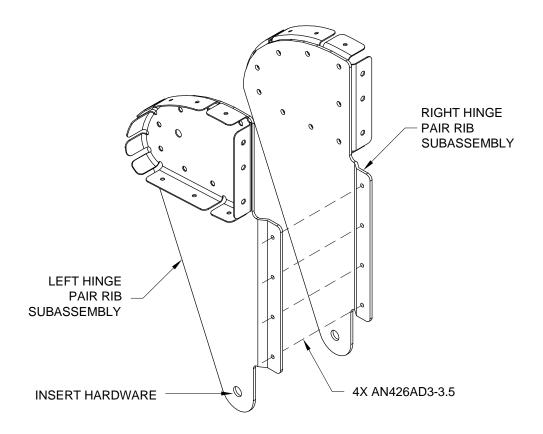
RIVET HINGE PAIR SUBASSEMBLIES
